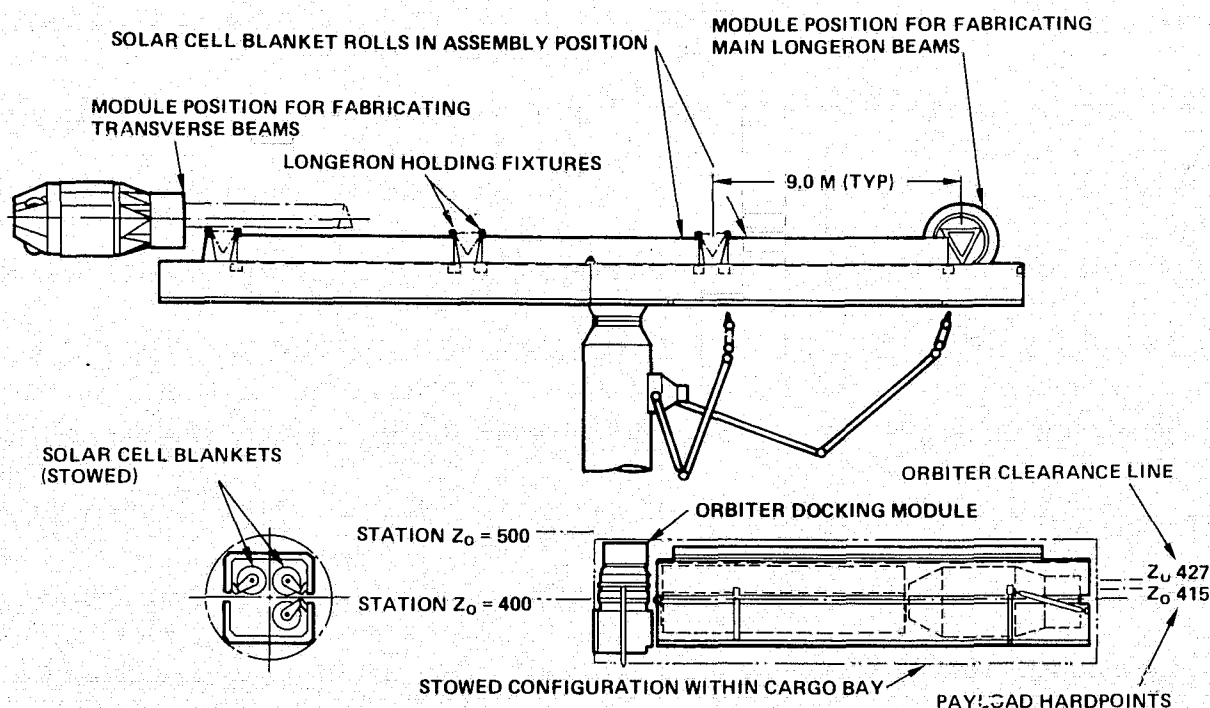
Fabrication/Assembly Tooling for 150-500 kW Power Platform-Ladder Concept
